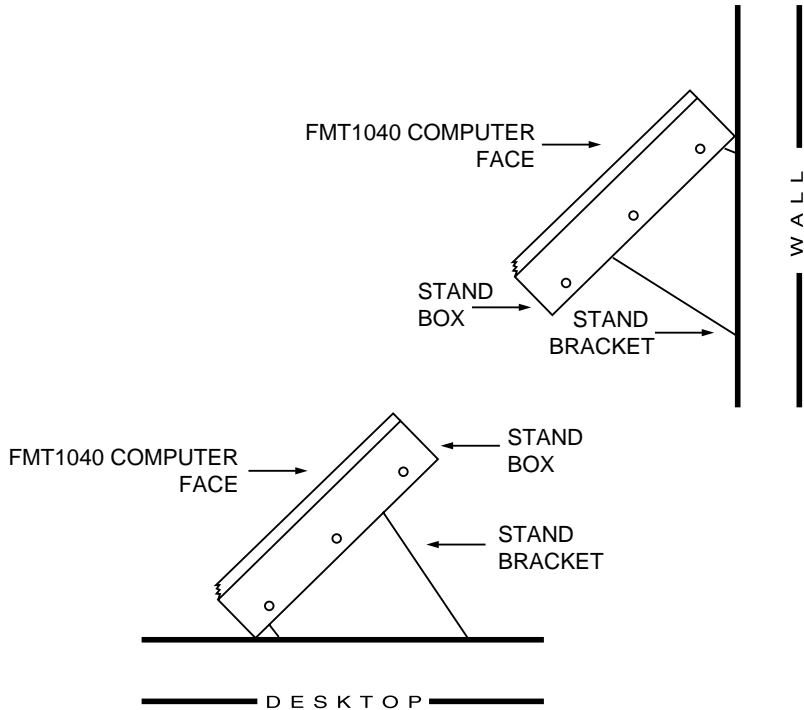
Two Possible Installations Using the Wall/Desk Stand
